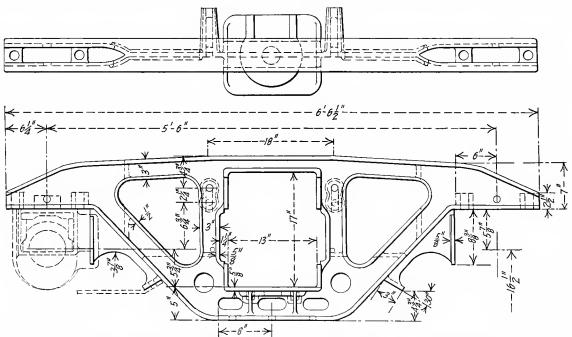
Cast Steel Truck Side Frame for 50-Ton Capacity Freight Cars. Pittsburgh Equipment Company.
